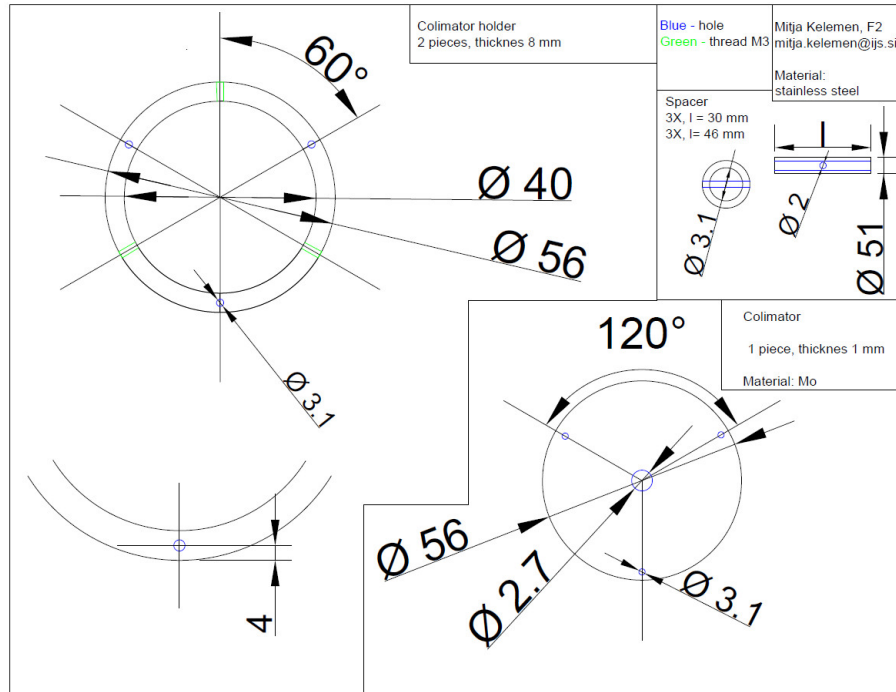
Technical drawing of collimating aperture and holder for ECR ion gun.
